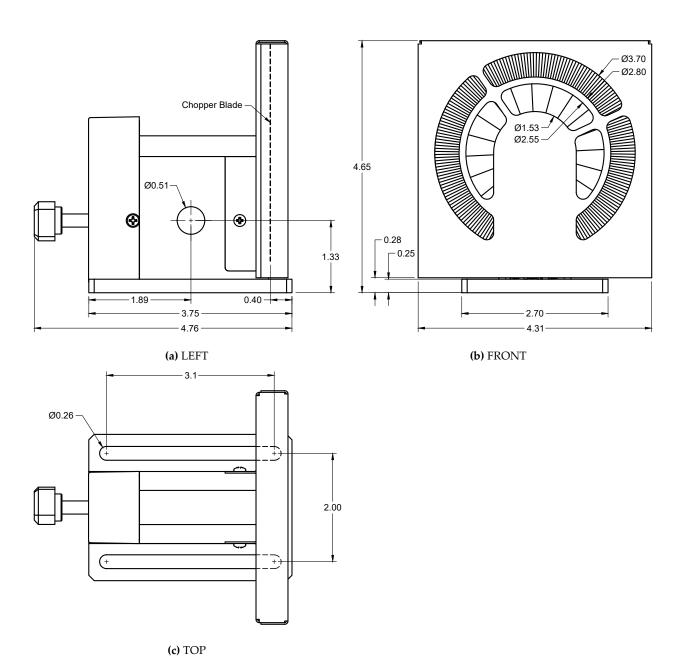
Dimensions (in inches) of the SR542 chopper head.
